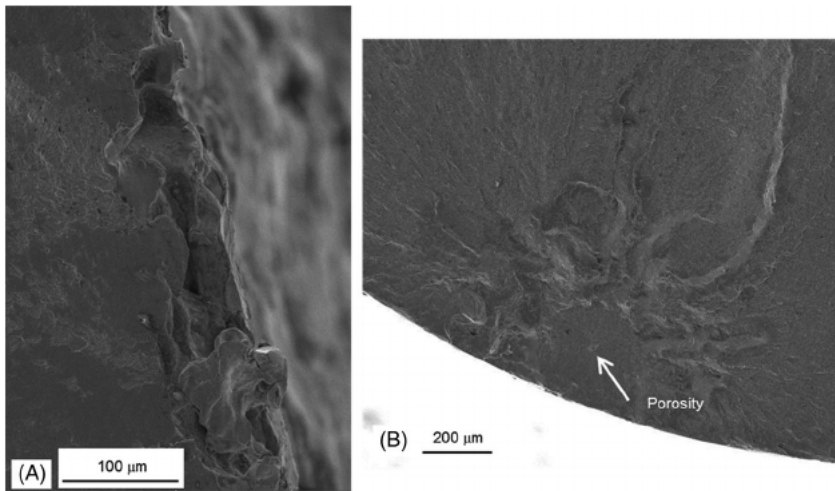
Crack initiation points in (A) an unmachined sample. (B) A machined sample with subsurface void
